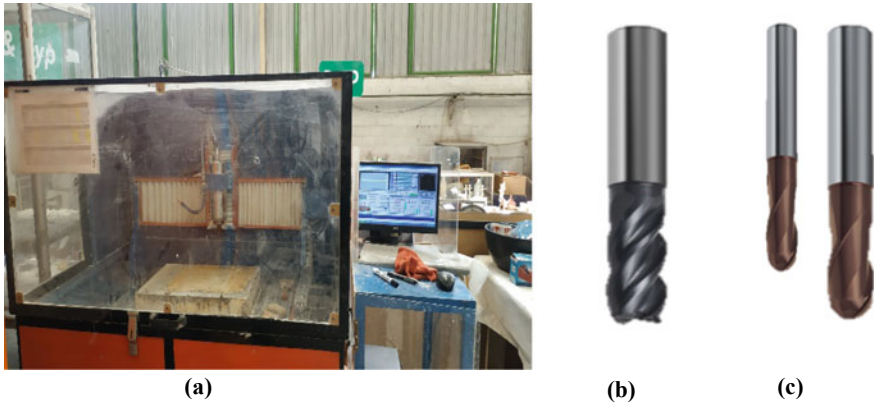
Machine and tooling research: a CNC machine; b End Mill; c Ballnose
